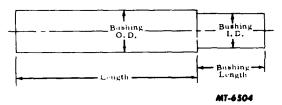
Recommended Type of Camshaft Bushing Removing Tool
